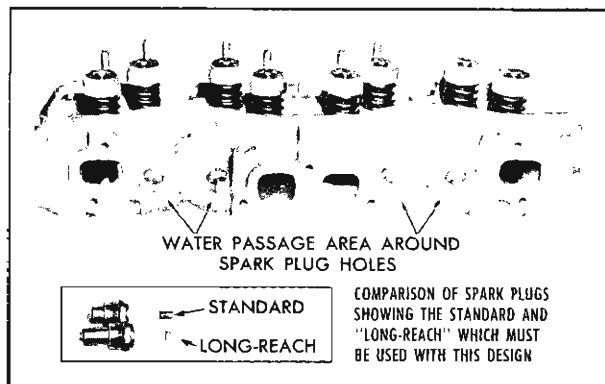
Cylinder Head Spark Plug (Long Reach)
